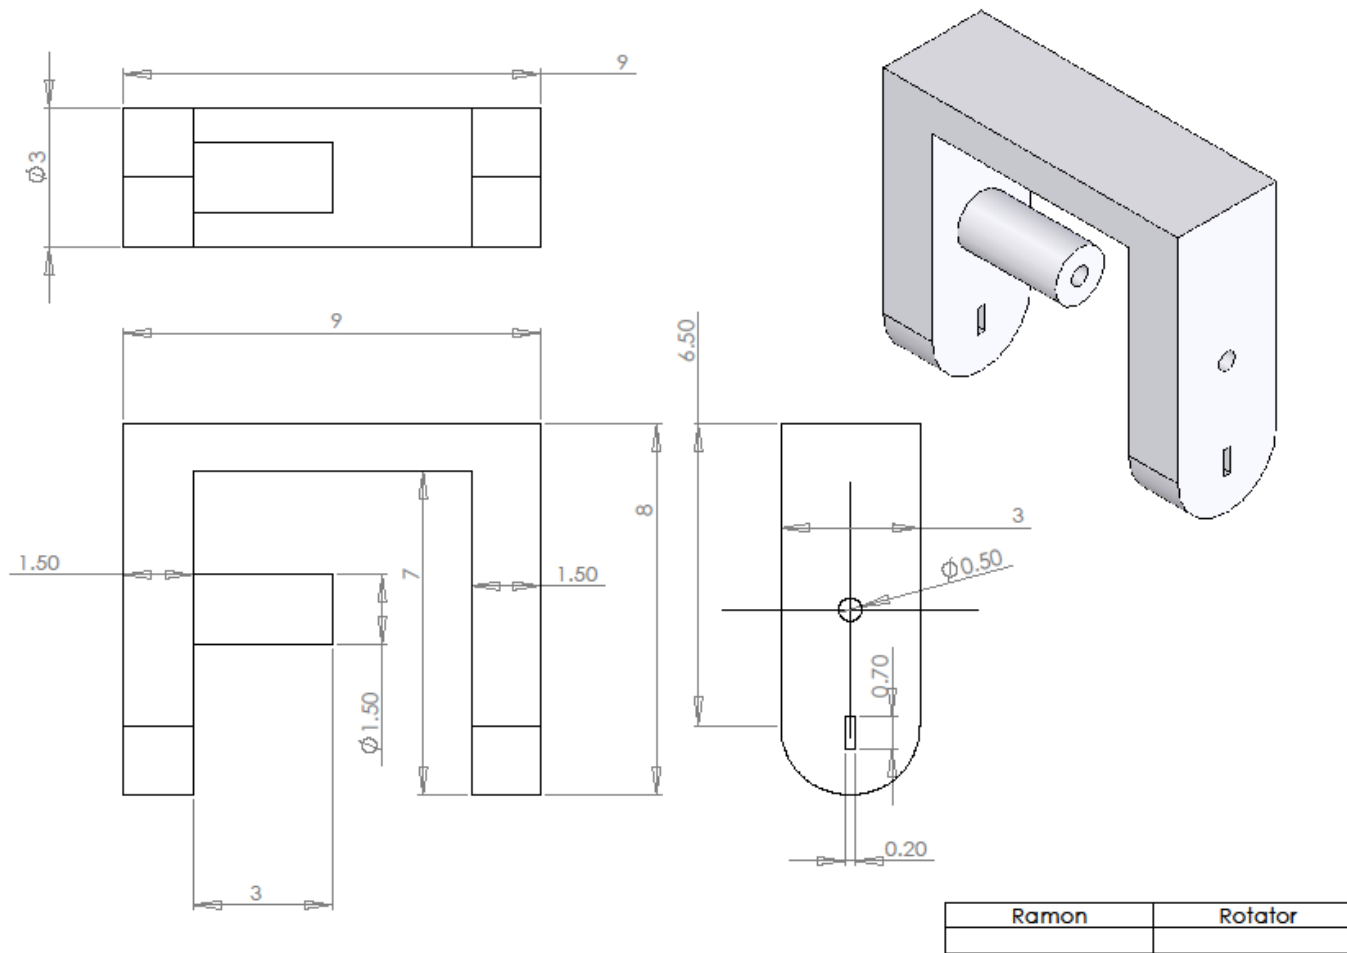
CAD Drawing of the Rotator of the 2-DOF sensor.
